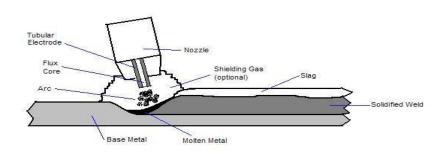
Flex Core Arc Welding (FCAW)
